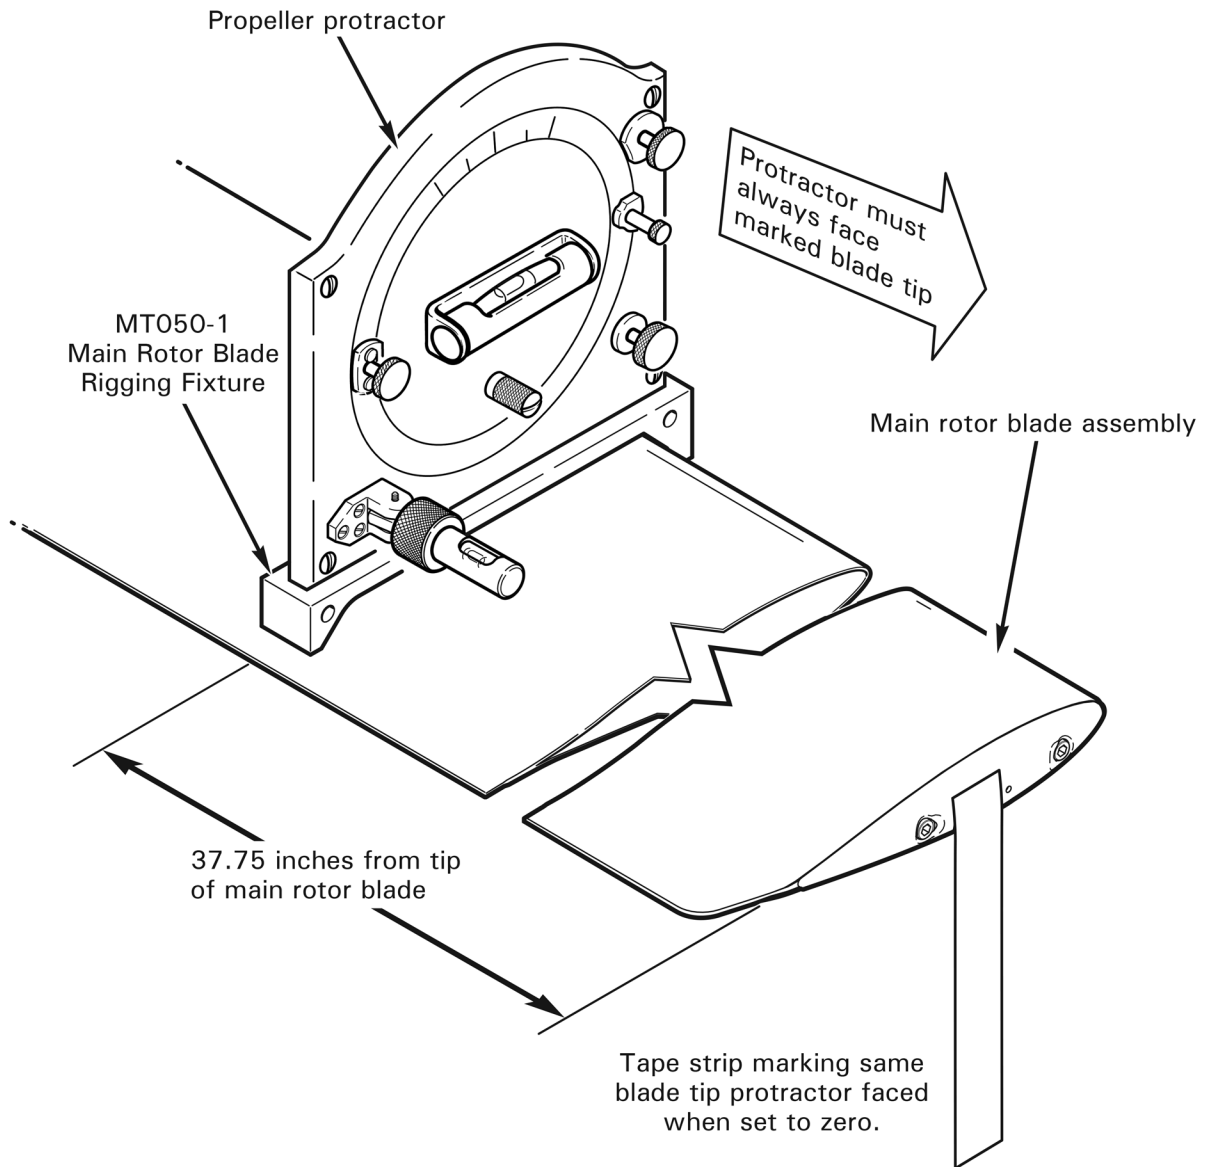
MAIN ROTOR BLADE RIGGING
